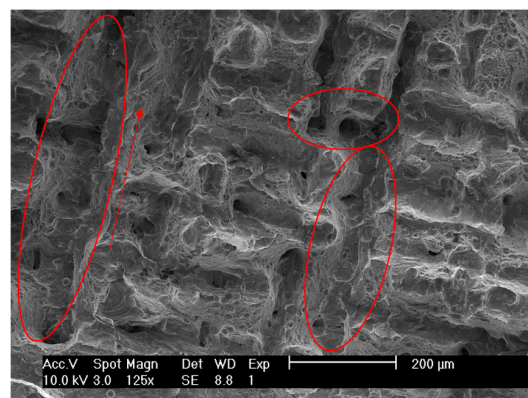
Fracture surface of HS/SM sample 3D-printed at 200 mm/s.
